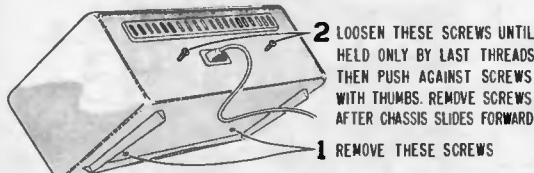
Rear View of Cabinet Showing Chassis Mounting Screws.
